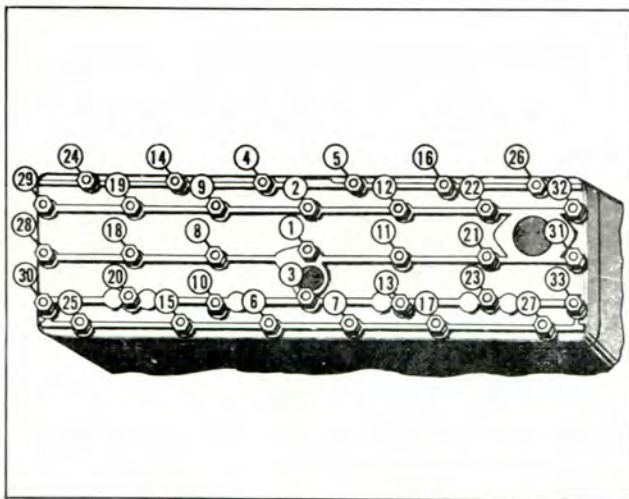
Cylinder Head Stud Nut Tightening Sequence
